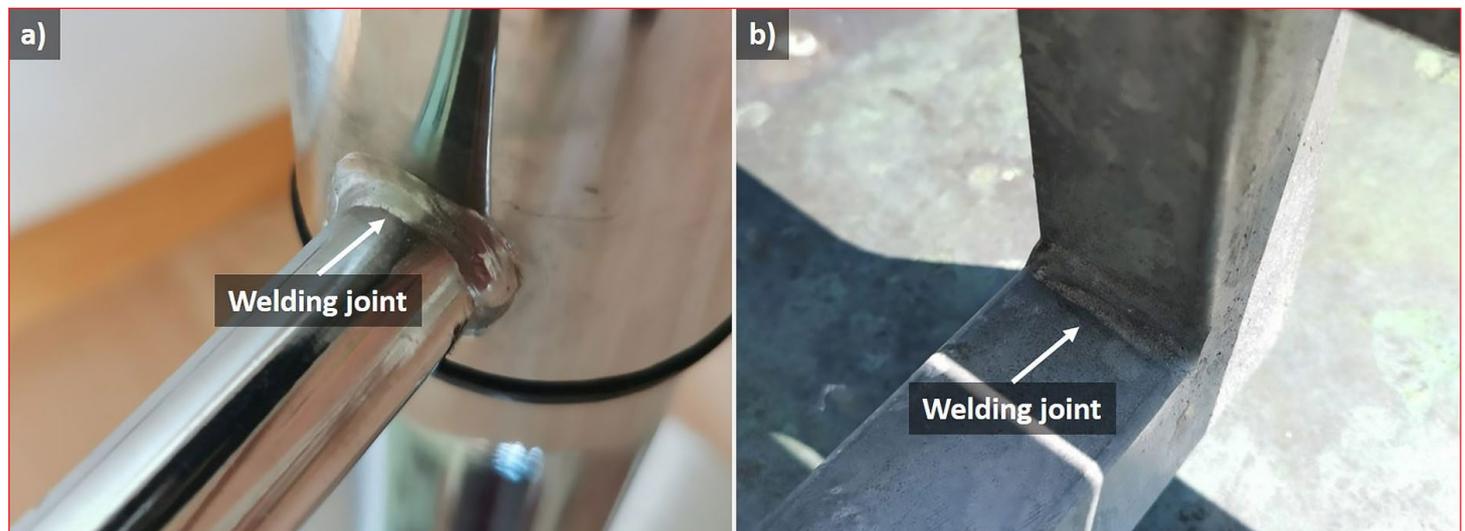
Examples of welding joint. a) A welding joint on my bar chair leg. b) A welding joint from my balcony of metallic construction.
